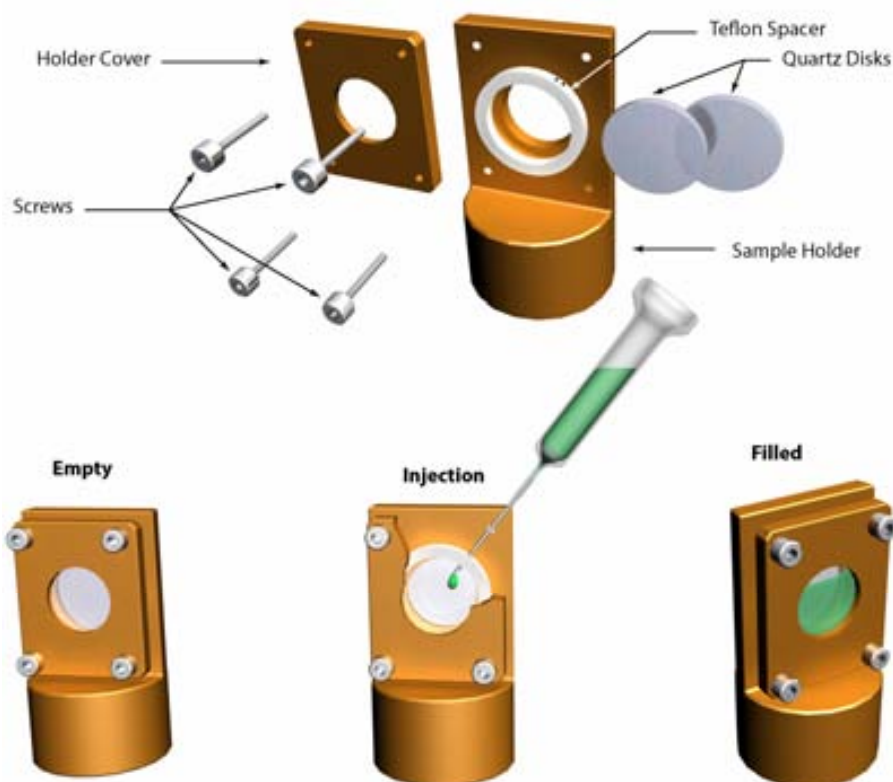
View of the different parts of the sample holder (above) and injection in the mounted sample holder through the Teflon spacer (below)
